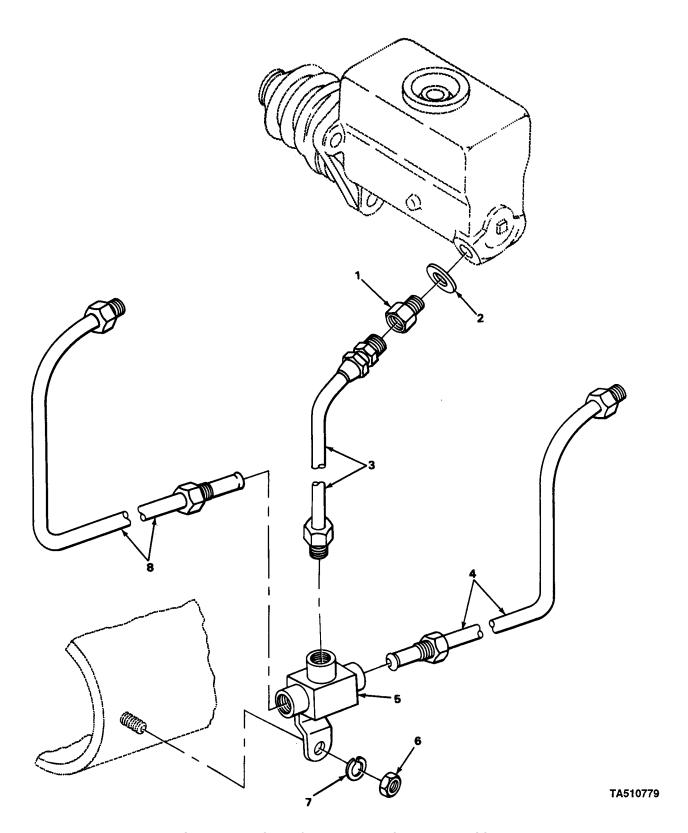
MASTER CYLINDER LINES AND FITTINGS.
